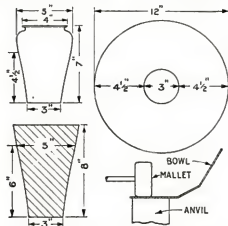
Dimensions of disk, half-finished, and finished vase; and how the flutes are removed.
